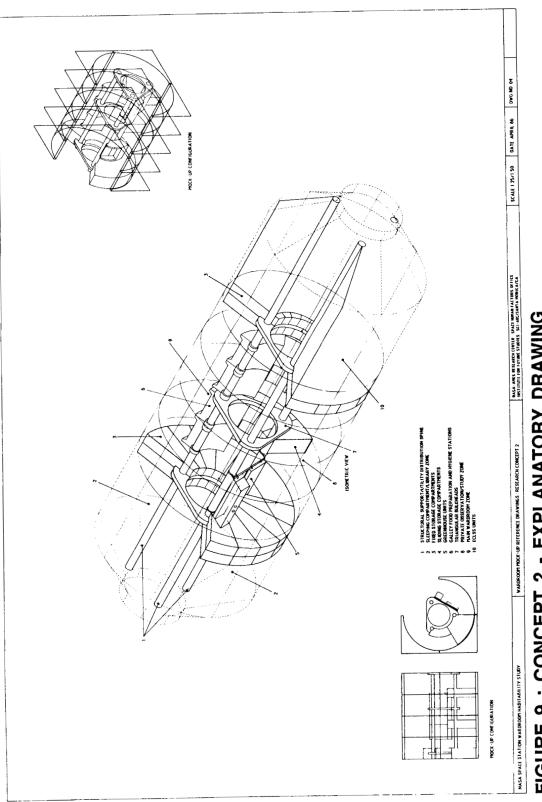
CONCEPT 2 - EXPLANATORY DRAWING
